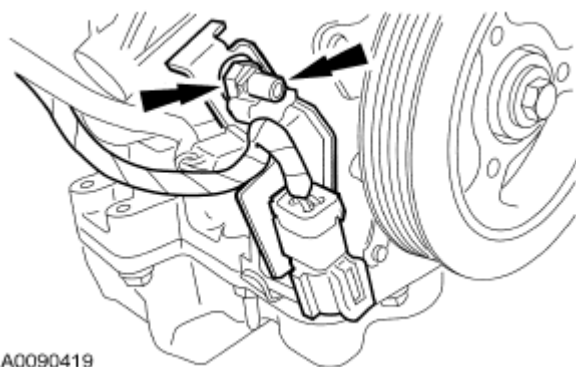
Locating Heated Oxygen Sensor (HO2S) Electrical Connector
